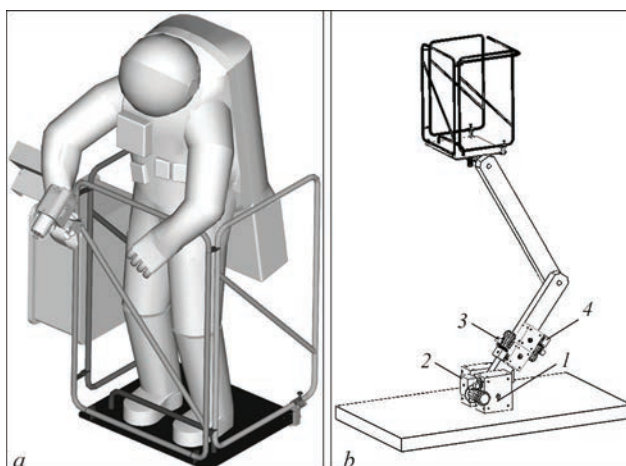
General layout of the welding operator platform and arrangement of the technological block with the seat for the tool and control panel in the “cradle”: welding operator platform (*a*), manipulator with drives 1, 2, 3, 4 (*b*)
